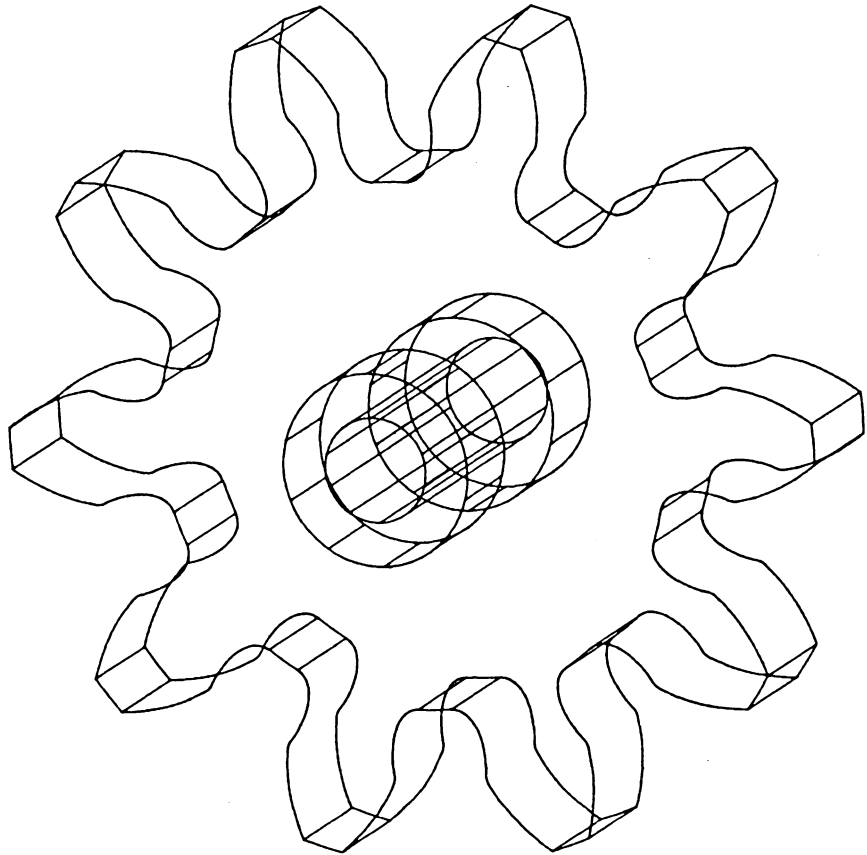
A 10 Tooth Gear with a Hub on Both Sides - CADAM
